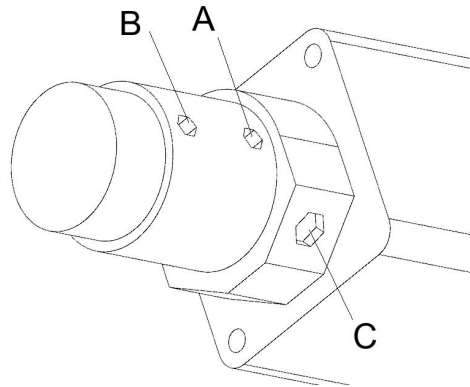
Schematic diagram of the motor on the rear cover of welding gun
